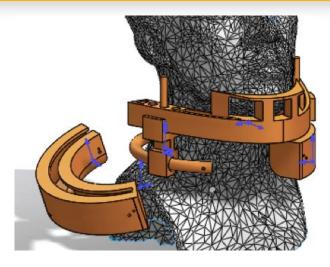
An exploded view of the device shows that the inner spring track is contained within an outer shell. This isolates spring movement.
